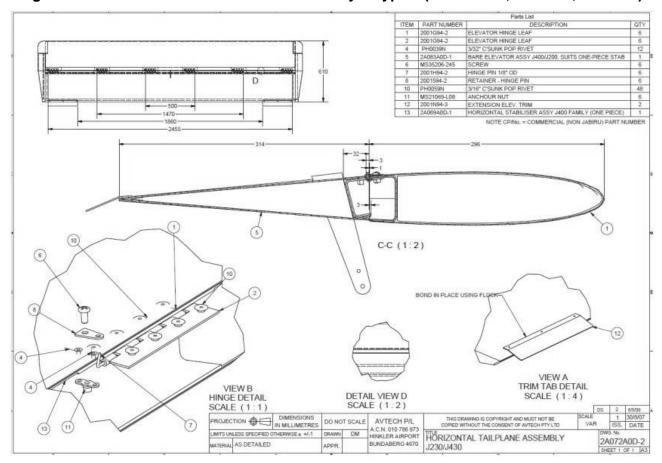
Horizontal Tail & Elevator Assembly Type 2 (all J-Series, n/a J120, n/a J160)
